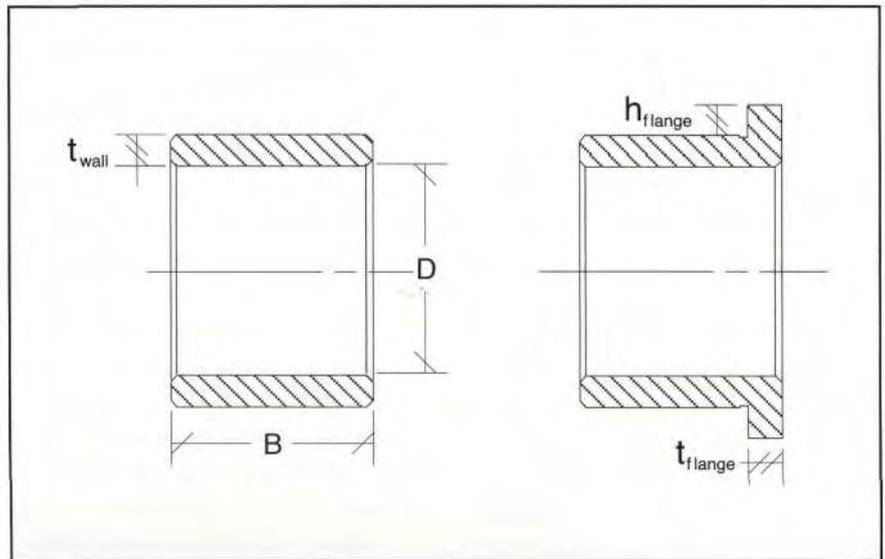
Dimensions for Straight and Flanged Bushings.
